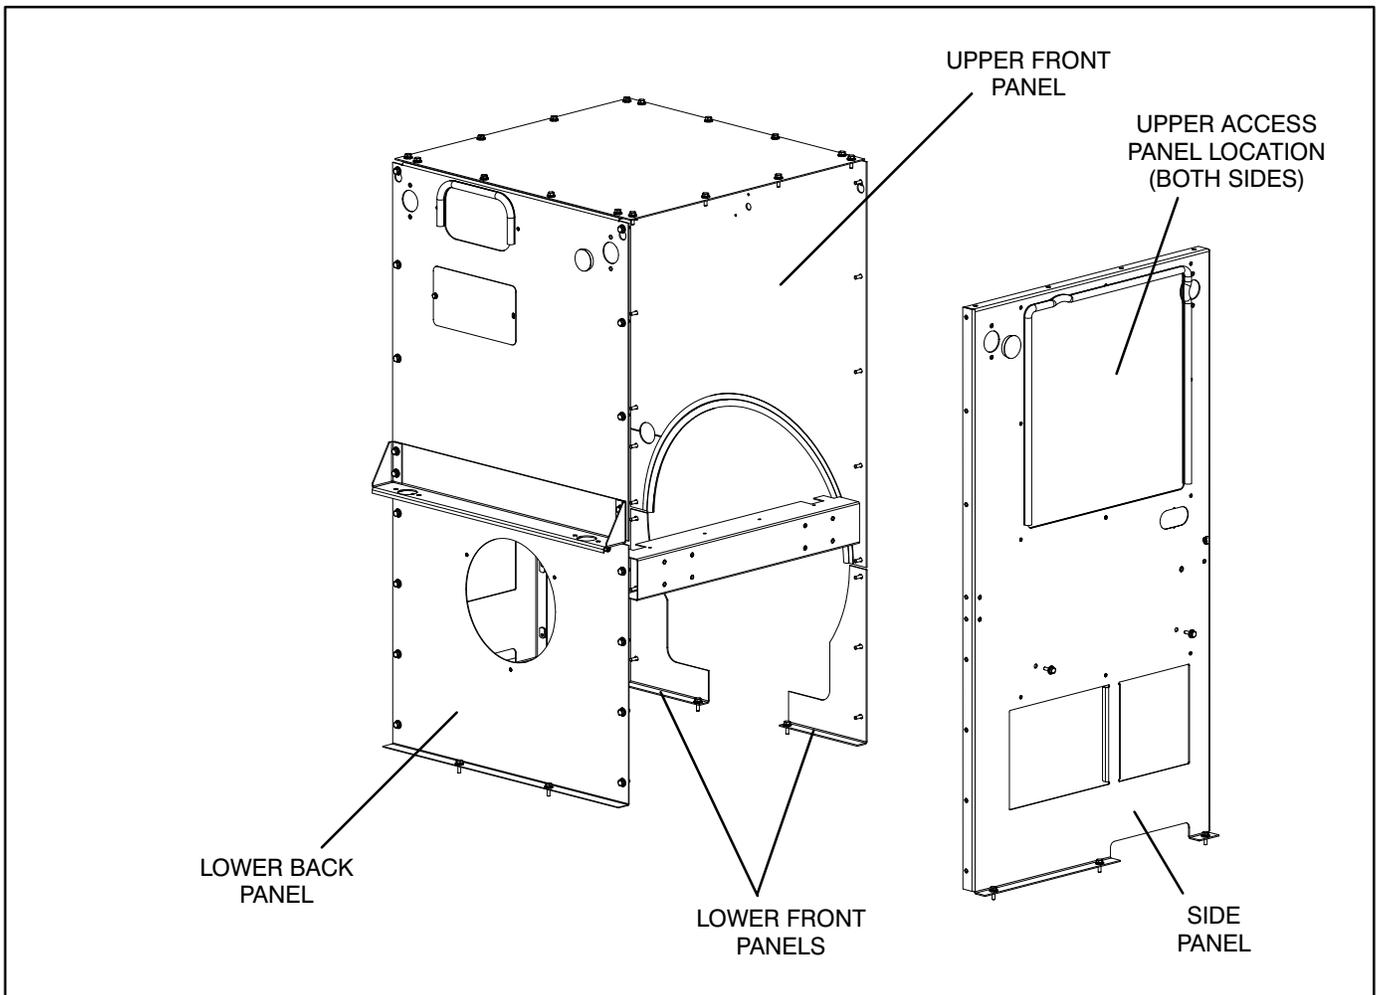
CONTROL HOUSING ASSEMBLY
